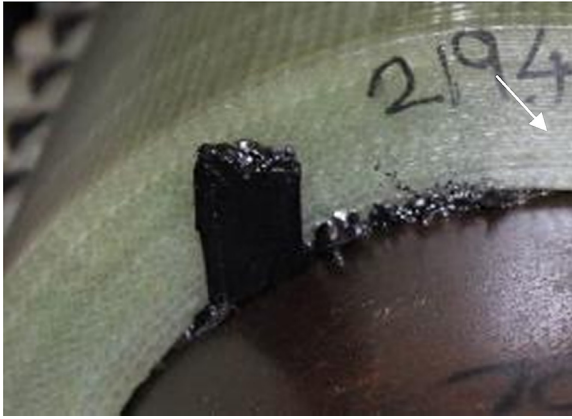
Seal extrusion that brought about loss of pressure containment to the clamp with a softer seal.
